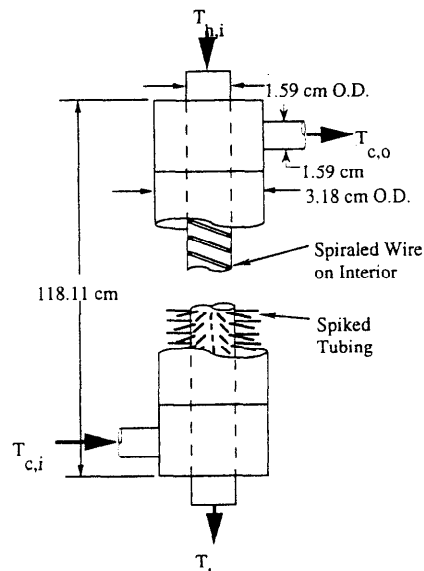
Single-Pass, single-wall, with enhanced heat transfer surfaces, tube-in-shell heat exchanger.
